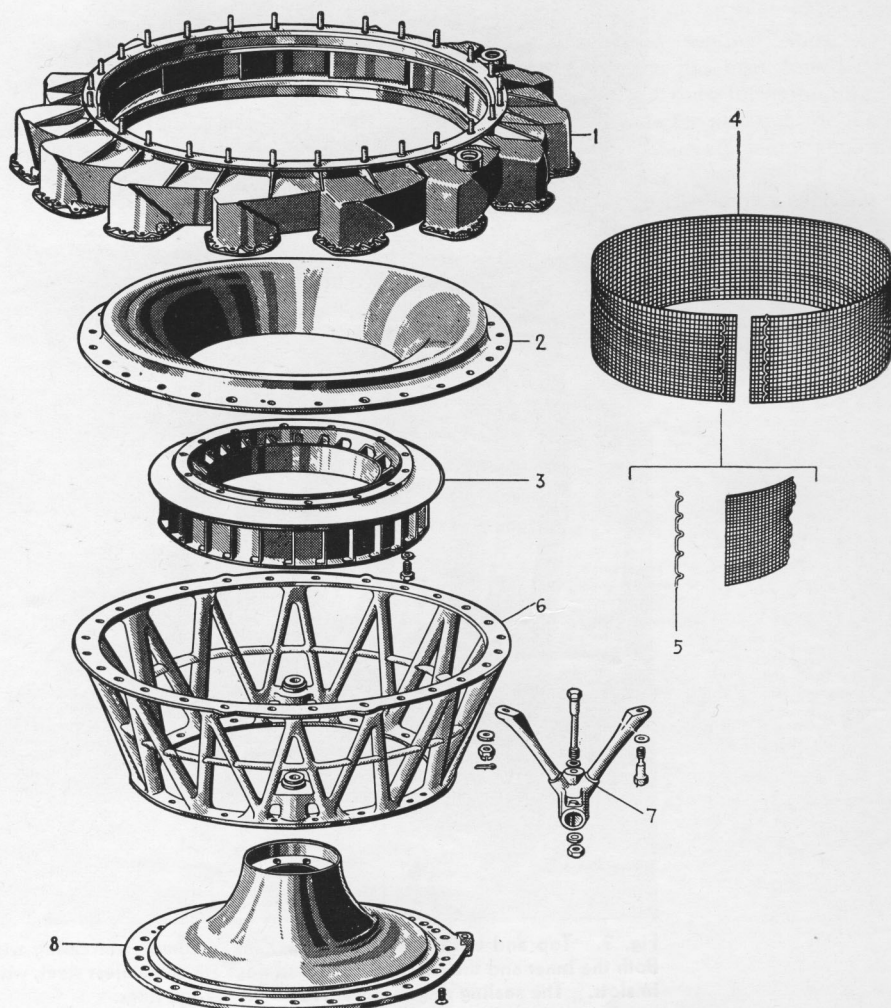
Rear section of the I-40 turbojet compressor assembly: (1) diffuser; (2) casing; (3) rear guide blades; (4) rear screen; (5) hook; (6) rear truss ring; (7) trunnion support; (8) rear bearing and seal support.
